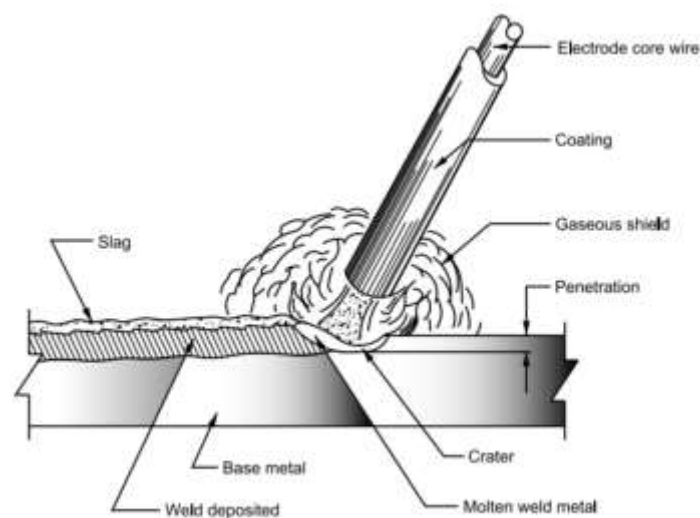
Shielded metal arc welding (Paktechpoint, 2016)
